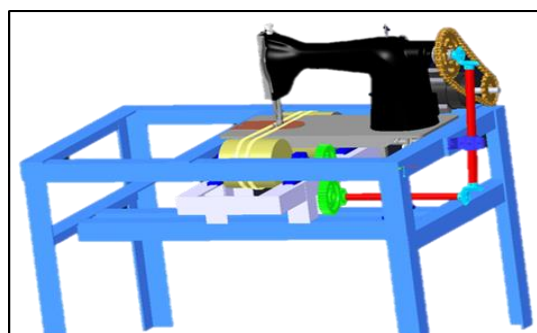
Design Concept III combination of gear and belt drive mechanisms
